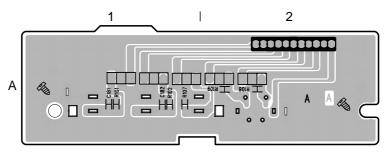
EU55 Front Jack PC Broad (Bottom side)
